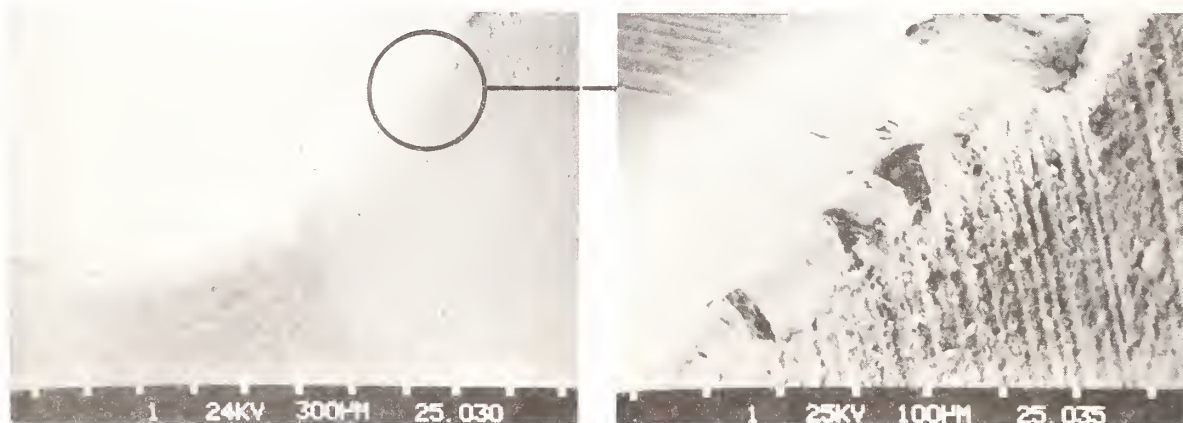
Cohesion failure and consequent spalling of TiN coated K-type substrate tools (CFRP Machining)
